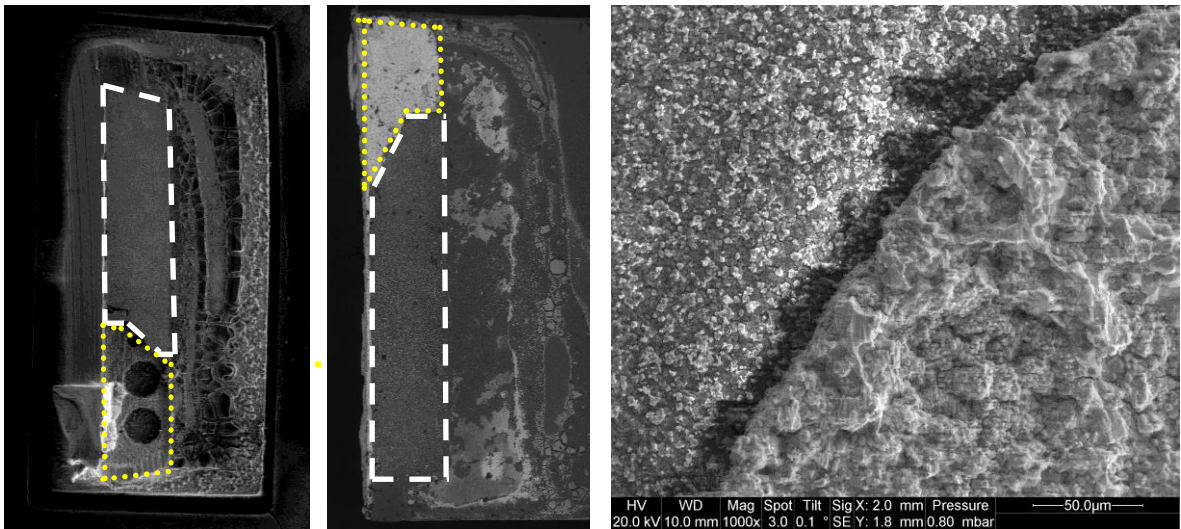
SAC305 500 hour aging 0 thermal/vibration cycles, left, solder joint on board, middle, corresponding chip lead flipped across horizontal axis, right, zoomed in fracture surface on chip lead (courtesy CALCE).
